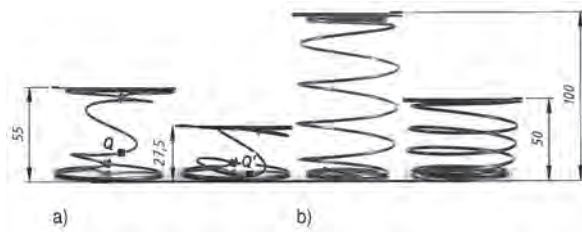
Geometry of deformed upholstery springs: a) bonnell, b) barrel springs
